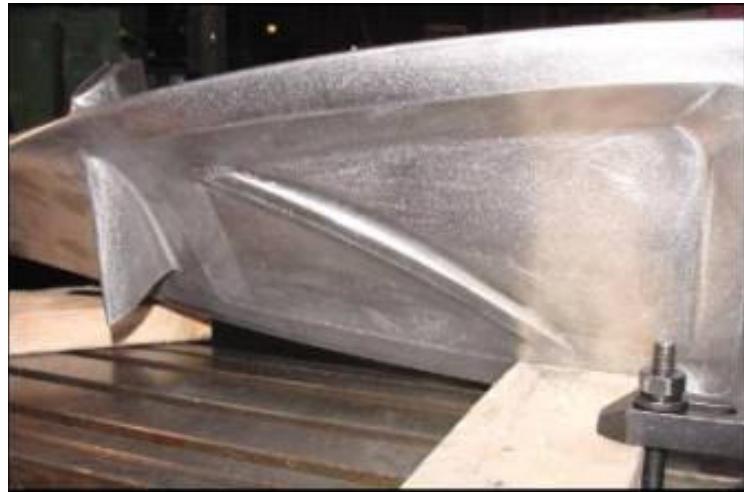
Machined Pocket: 33.5" Advanced Aerodynamic Design Hybrid LSB
